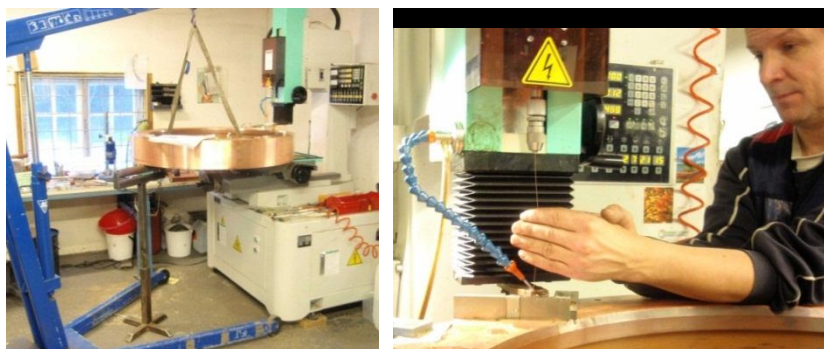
Arrangements for producing small size holes into EBW weld using rotating tube electrodes.
